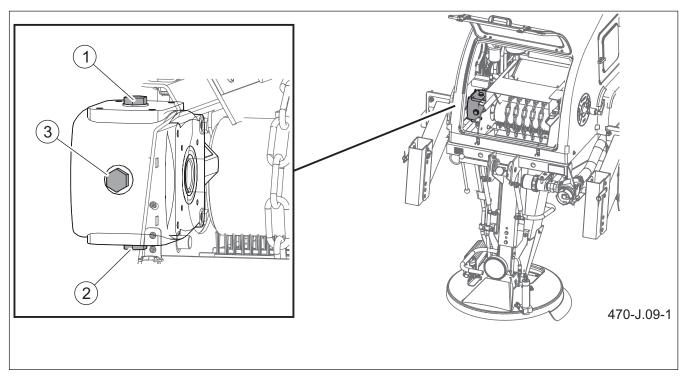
Inspect and replace oil in the gearbox
